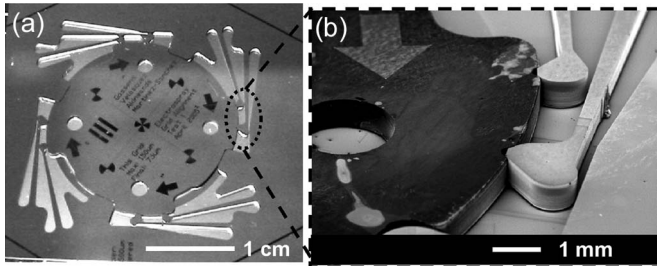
(a) Completed test structure and (b) a close-up view of a spring cluster of an assembled test structure. Four spring clusters, with each cluster being composed of two springs, are uniformly and azimuthally distributed around the twisting component to provide low stiffness while the assembly is in progress and high stiffness once the assembly is completed.
